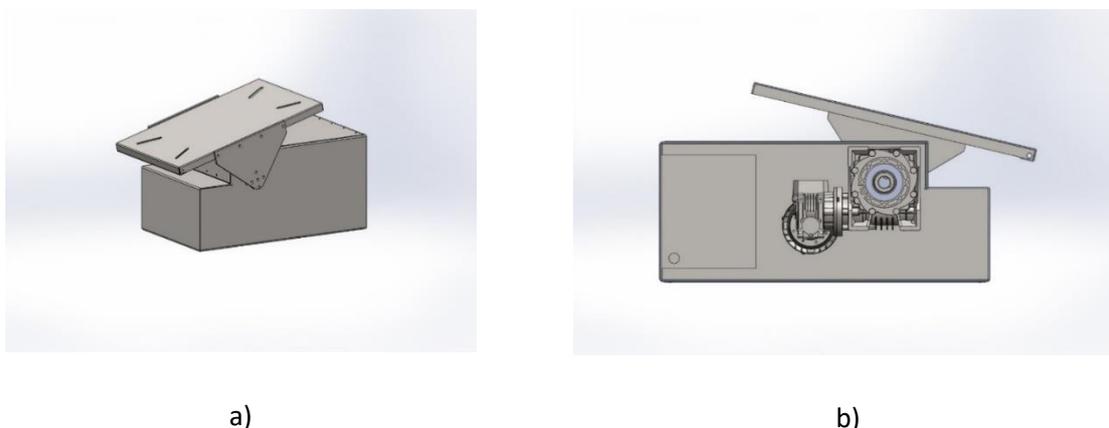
a) Schematic representation of tilting machine b) Positions of Motor Shaft and Gearbox in Machine Design
